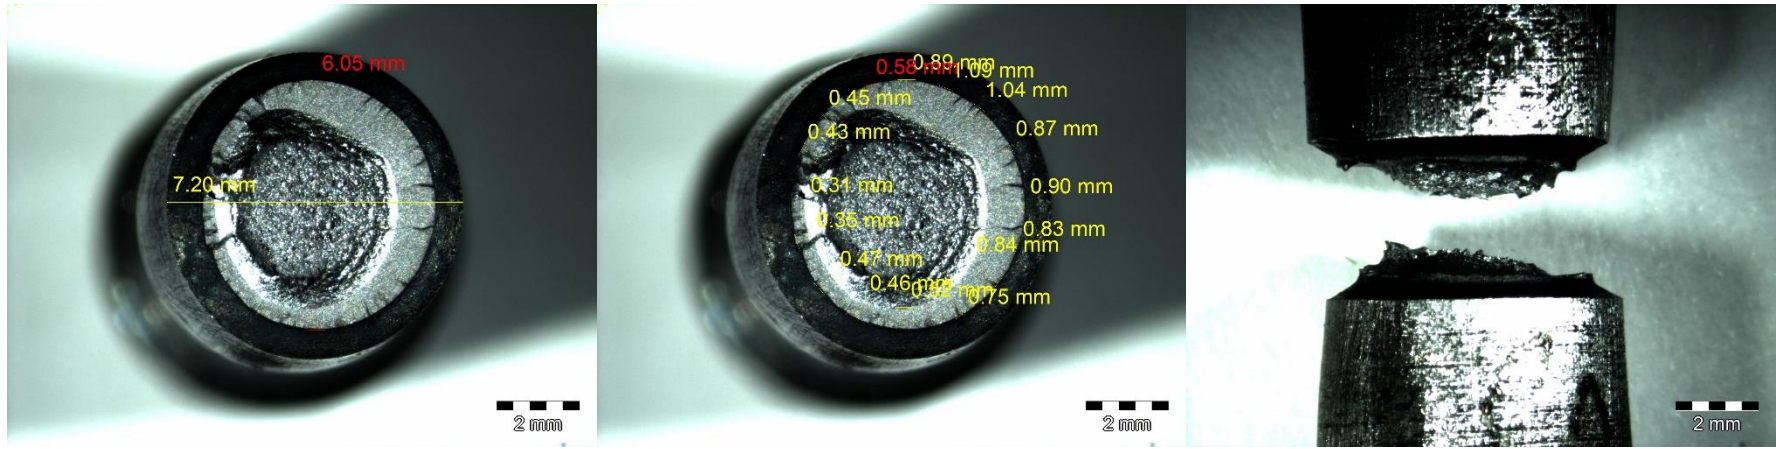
Cross-sectional and side view of fractured StxWSD-03
